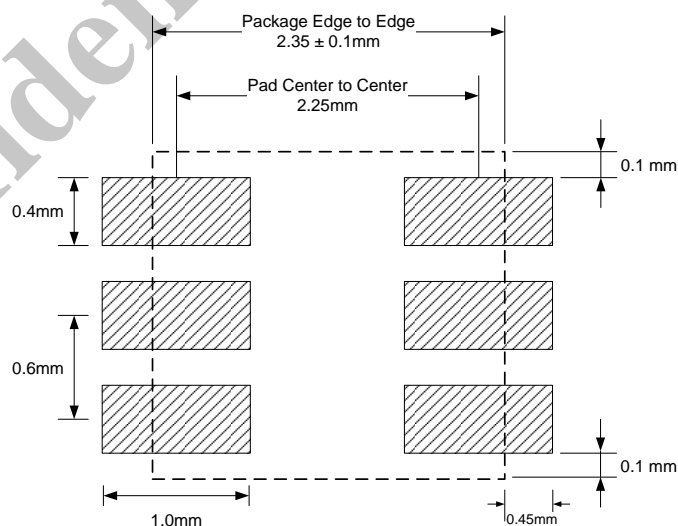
CM32181 OPLGA PCB Layout Footprint
